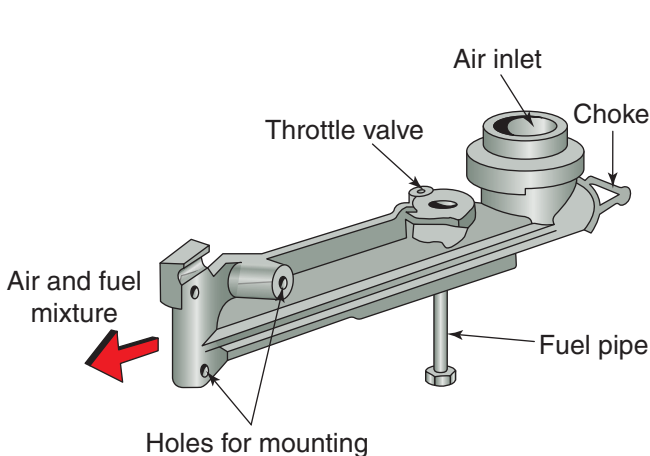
The vacuum type carburetor uses a simple, one-piece housing.
